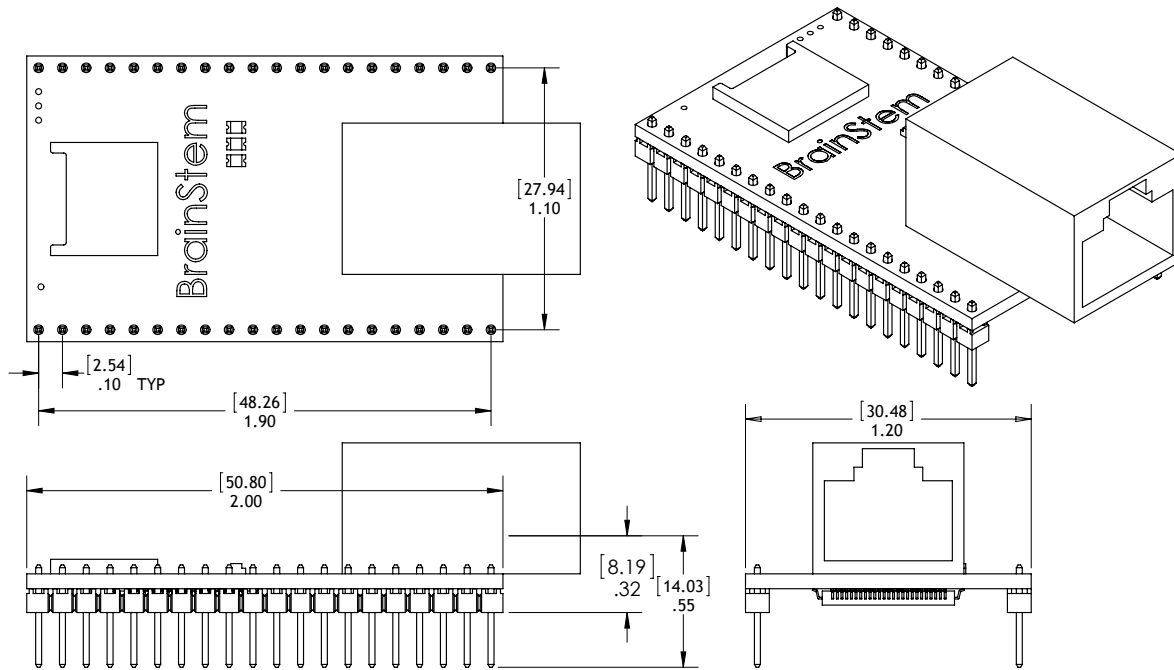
BrainStem EtherStem Module mechanical dimensions shown in inches [mm].
